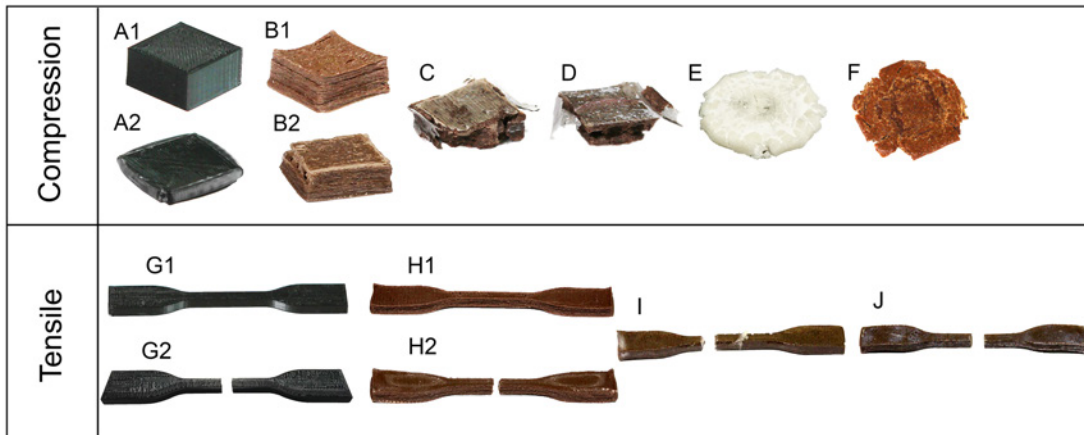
Compression tests on half-cubes: printed ABS before and after (A1, A2); printed “Pecan” before and after (B1, B2); “Pecan+Cyanoacrylate” after (C); “Pecan+Epoxy” after (D); molded “Rice+IPA” after (E); molded “Oak” after (F). Tensile tests on dog bones: printed ABS before and after (G1, G2); printed “Pecan” before and after (H1, H2); “Pecan+Epoxy” after (I); “Pecan+Cyanoacrylate” after (J).
